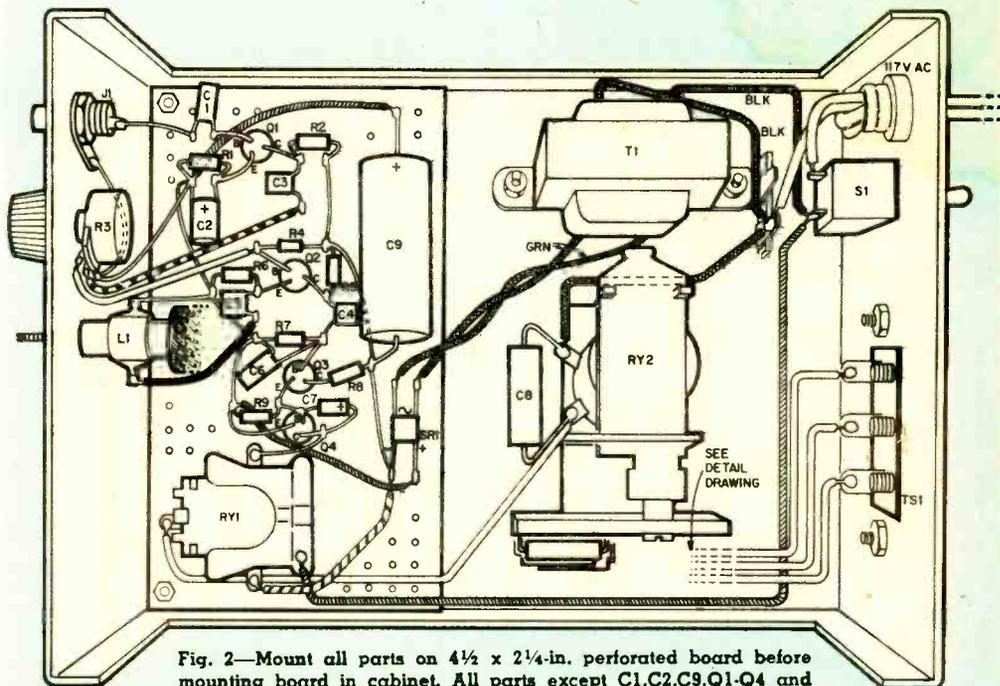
Mount all parts on 4½ x 2¼-in. perforated board before mounting board in cabinet. All parts except C1,C2,C9,Q1-Q4 and RY1 go on back of board. Connections to RY2 are shown in Fig. 6.
